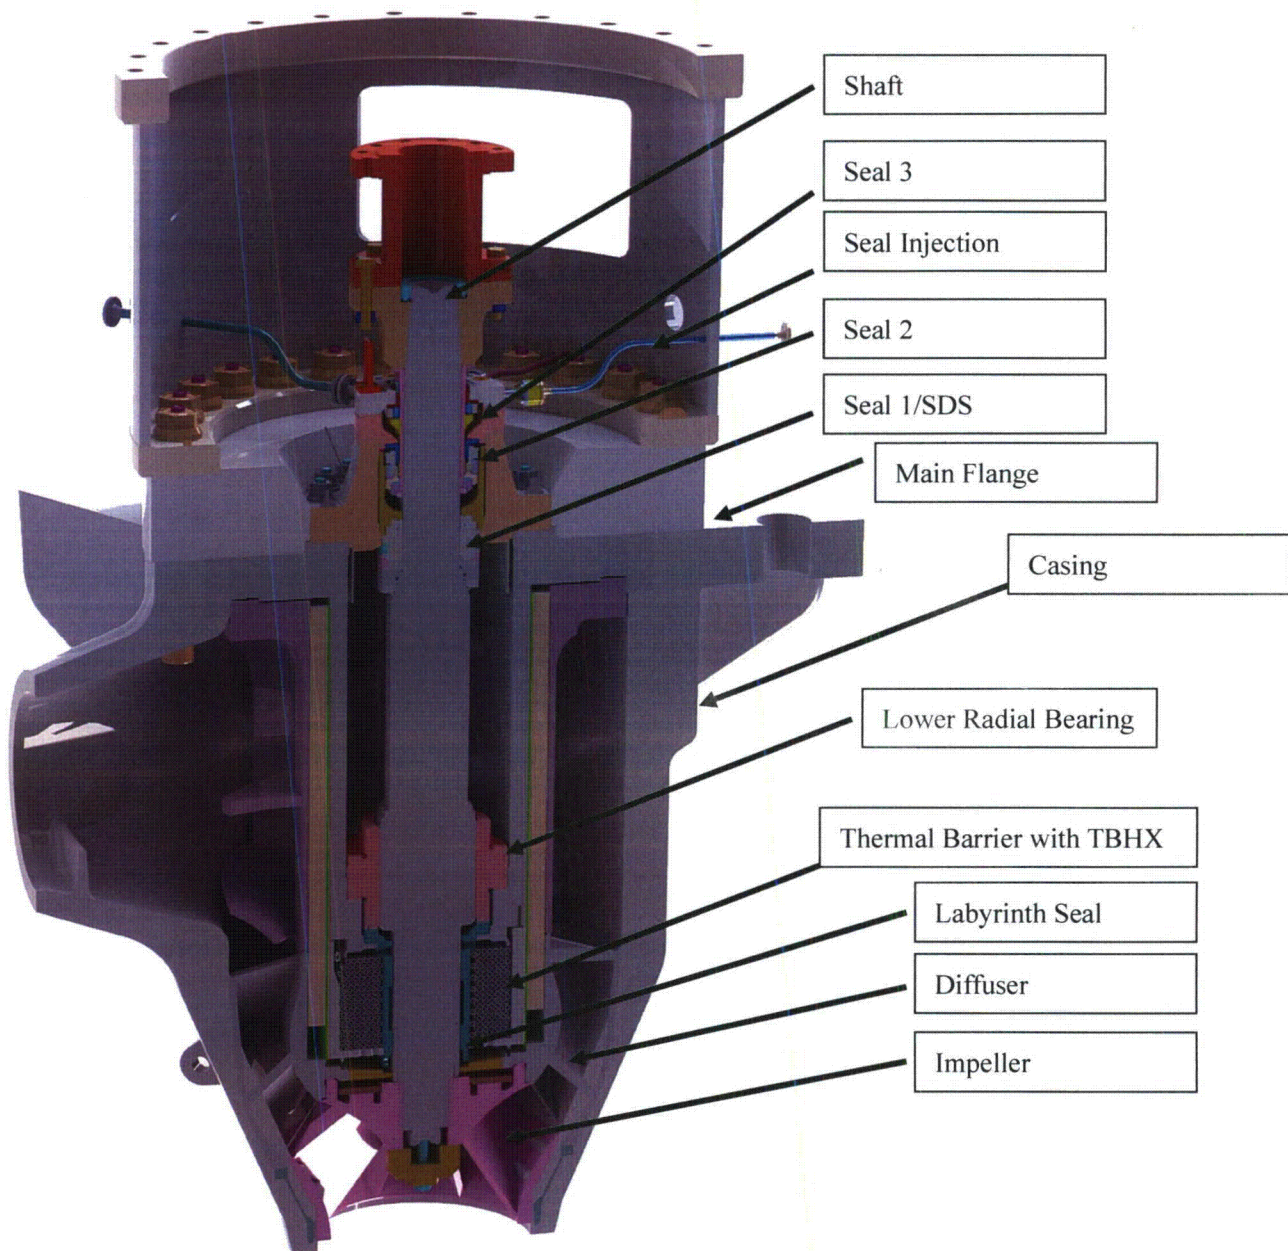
Cutaway of Reactor Coolant Pump and Seal Package
